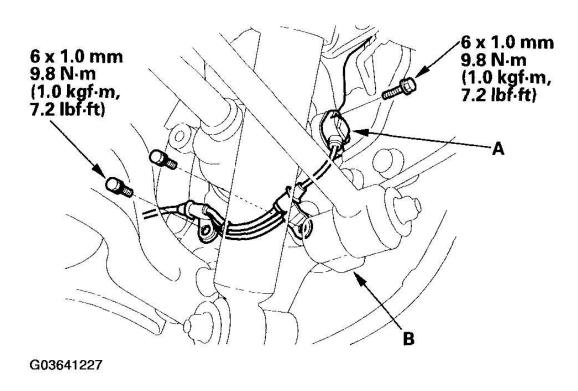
Removing Wheel Sensor And Sensor Harness From Knuckle Courtesy of AMERICAN HONDA MOTOR CO., INC.
